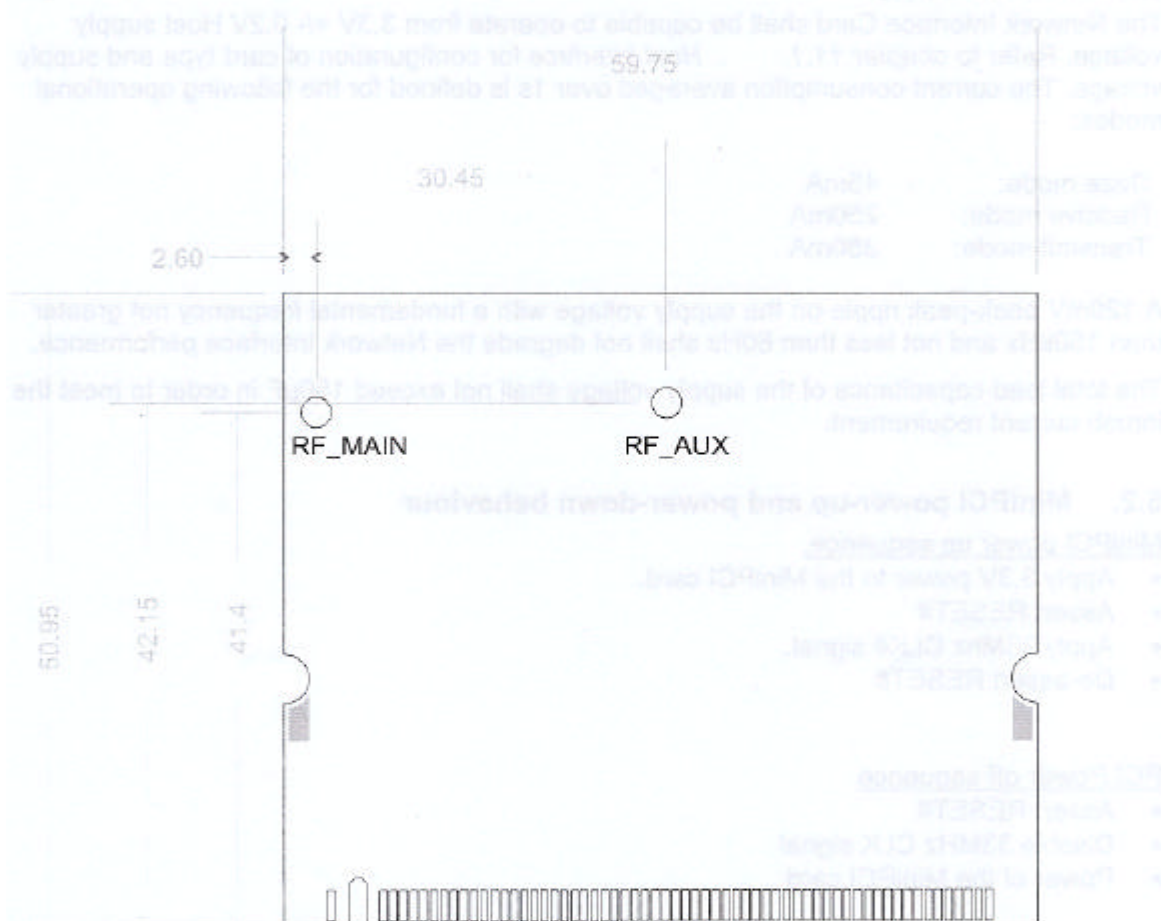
Board dimensions and location of RF-connectors. All dimensions in mm
